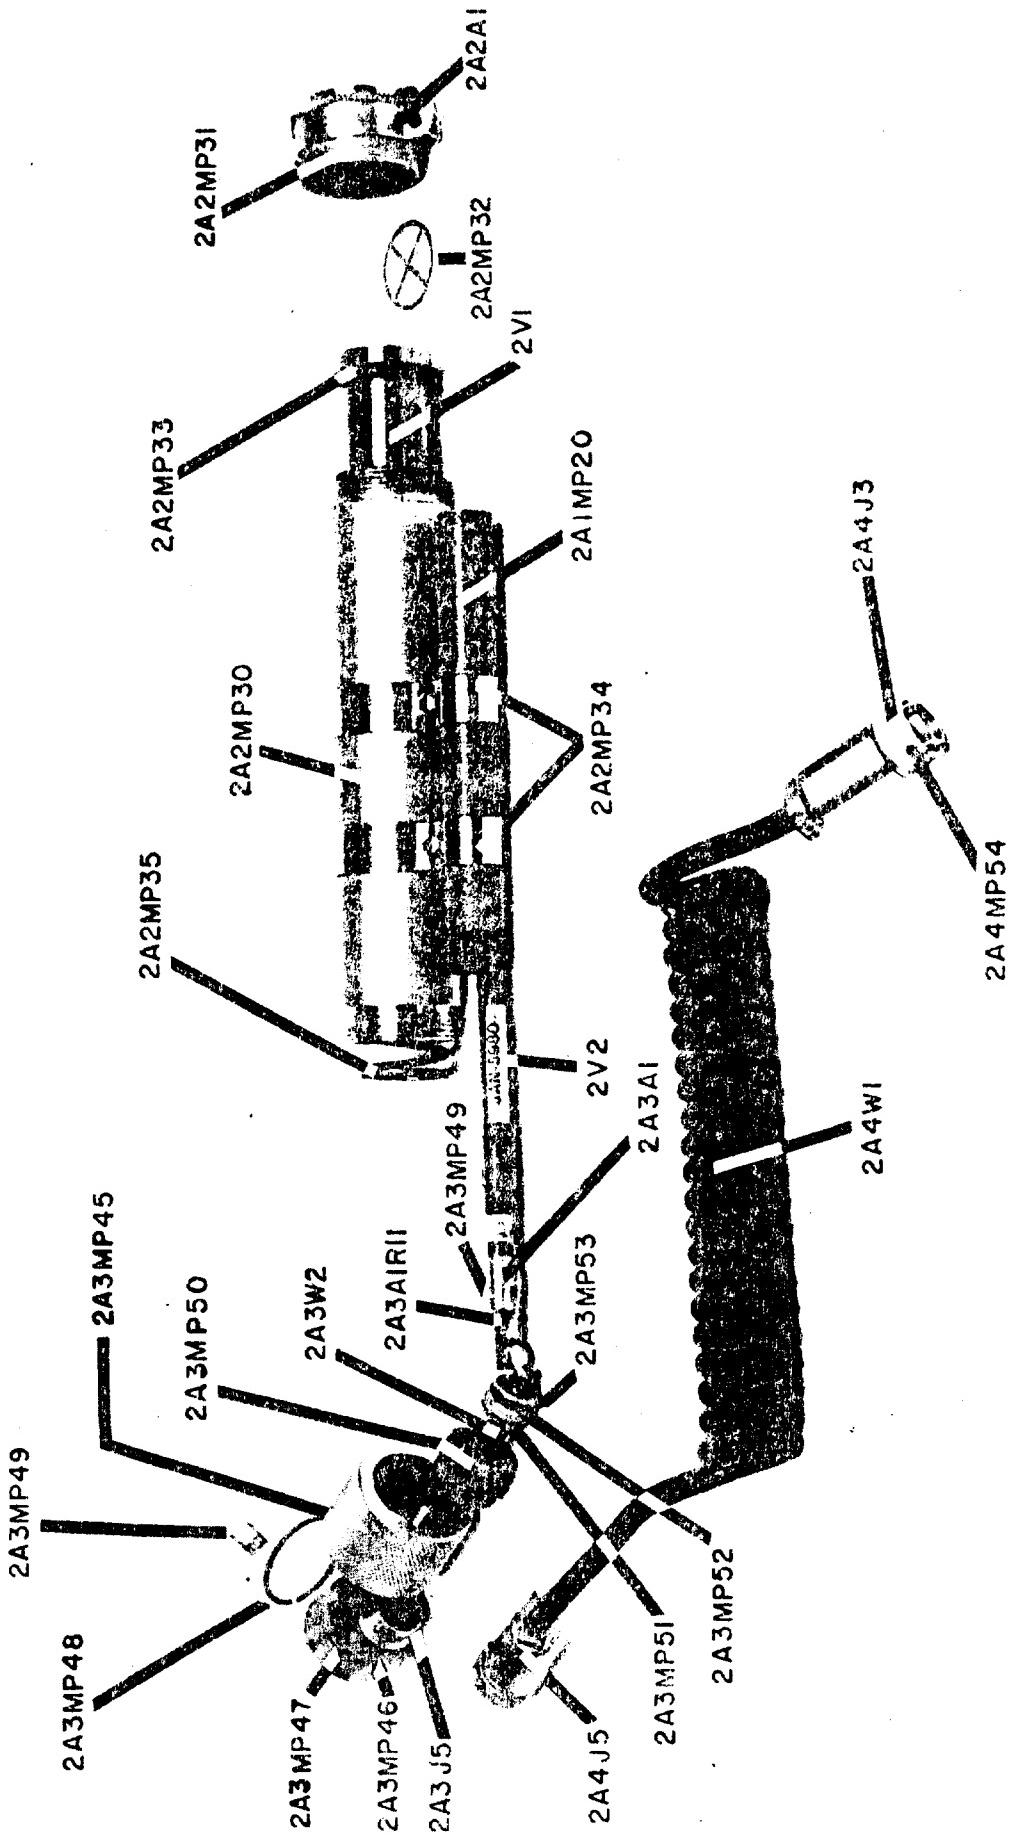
RADIAC PROBE, DT-613/PDR-27T DISASSEMBLED
